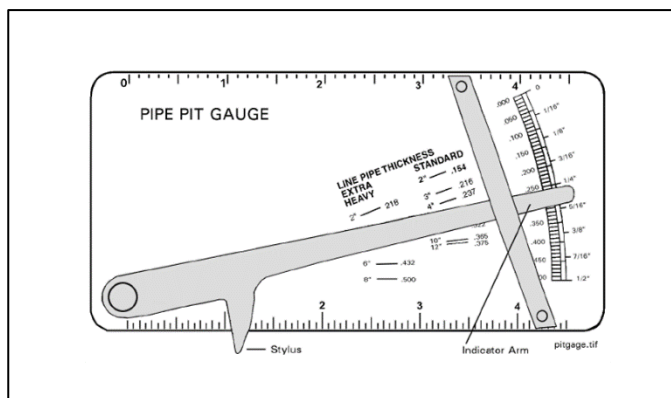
Pipe Pit Gauge (AG-1151, Stock Code 61 12 168)
